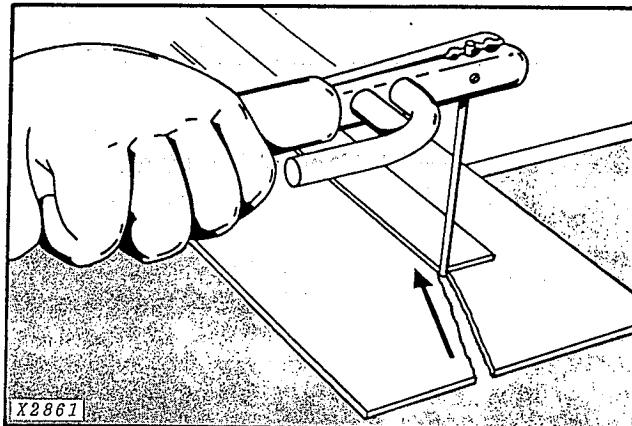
Cutting Thinner Plate With The Metallic Arc
